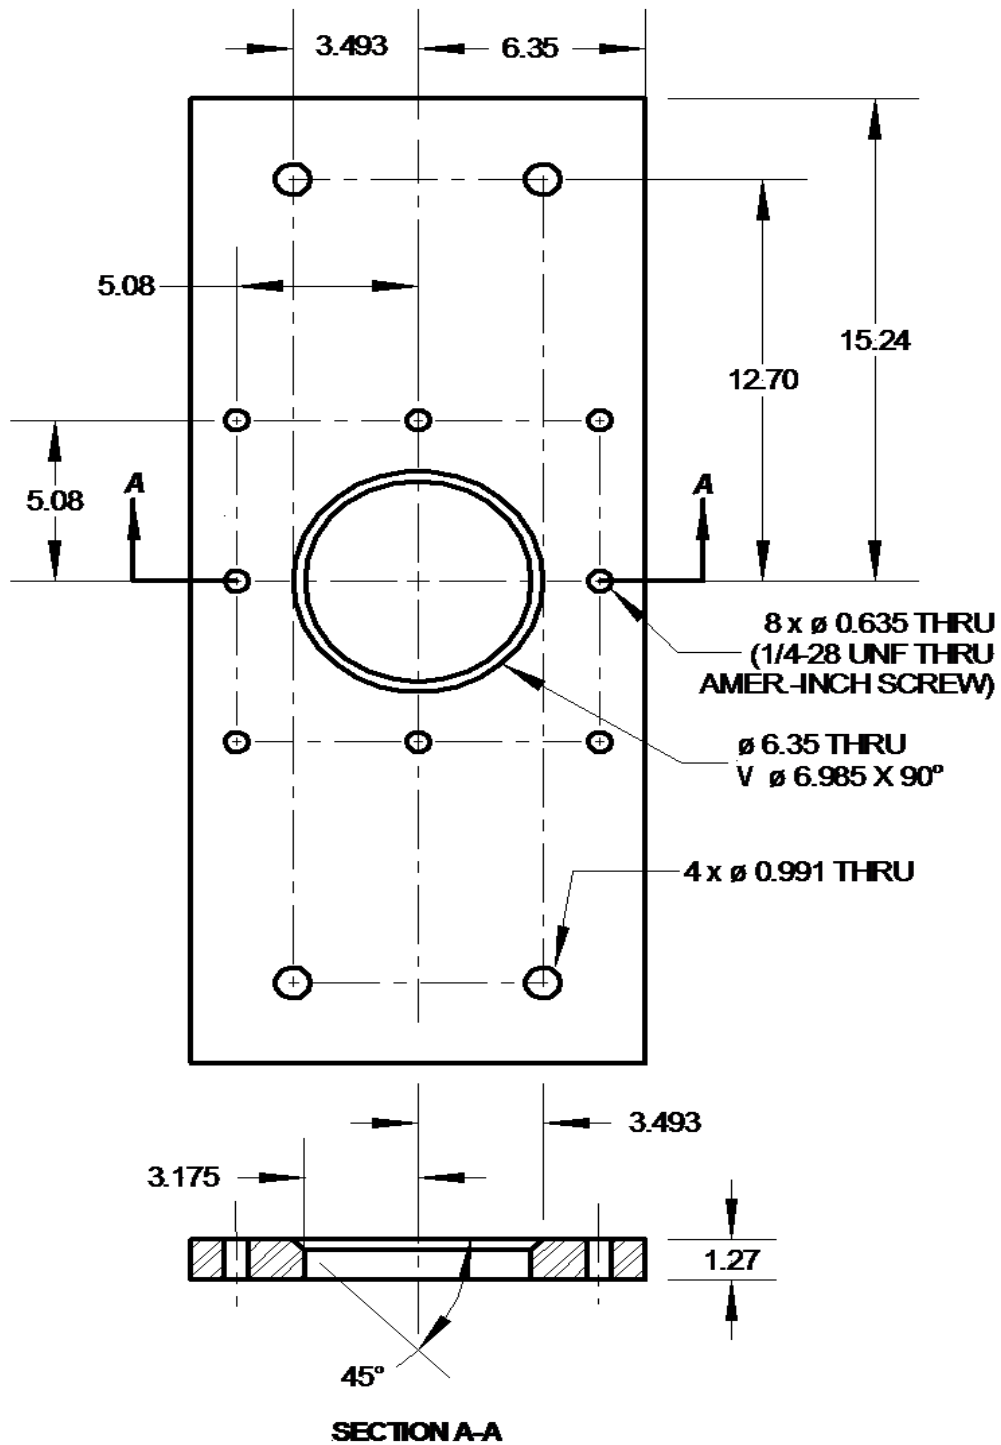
Bottom plate in the Dynatup plate specimen fixture assembly. The plate was machined from 304 stainless steel plate stock 1.27-cm thick. All dimensions are in *cm* unless otherwise specified.
